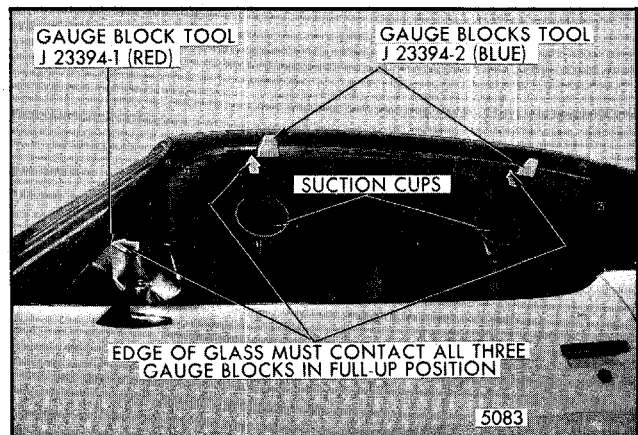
Door Window - Fore and Aft Alignment - "F" Styles
